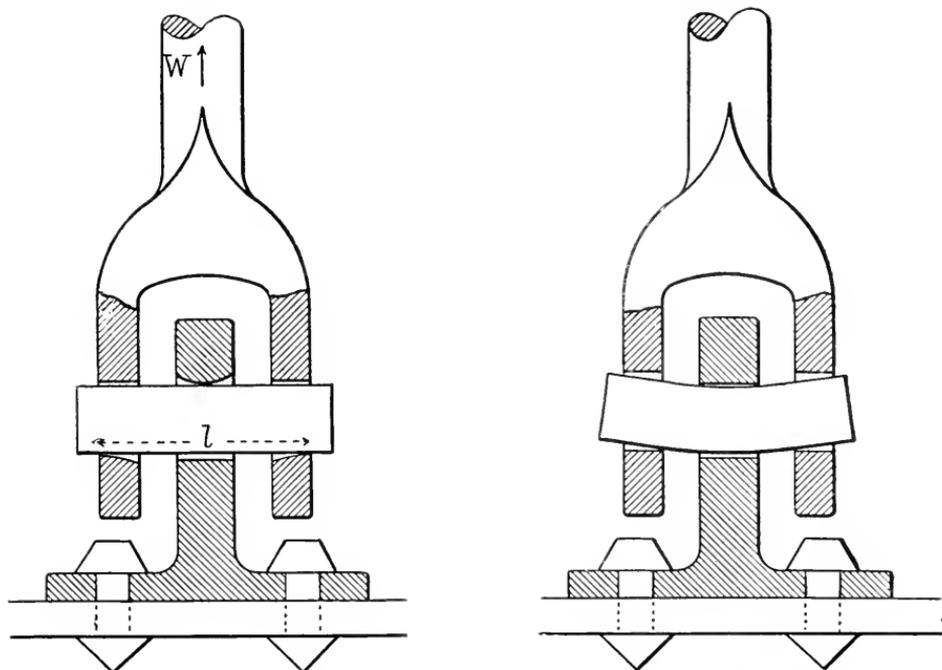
SIDE VIEW OF THE LUG SHOWN IN FIG. 1.
